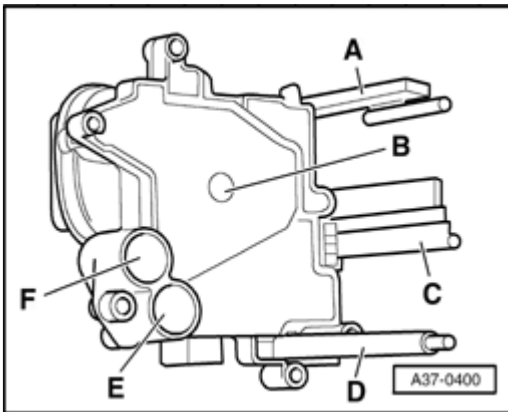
Identifying Sensors Of Soiling And Metal Shavings
